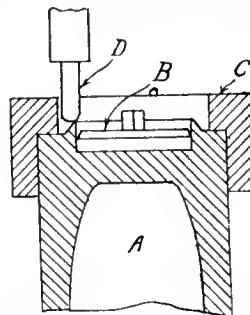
SKETCH SHOWING BASE PLATE RIVETING ARRANGEMENT.
